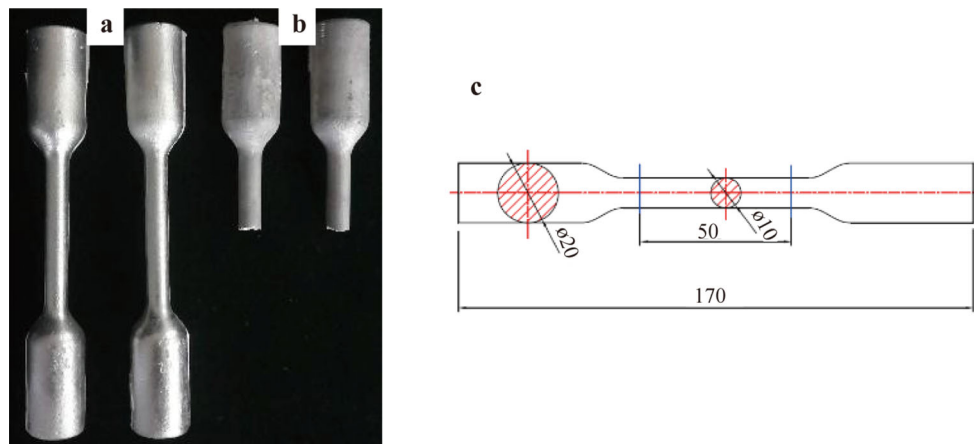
Round tensile specimens: a before tensile test, b after tensile test and c AutoCAD technical drawing (mm)
